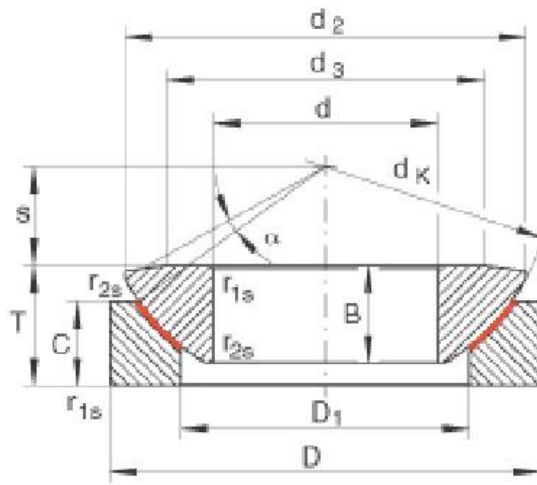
thrust bearings type *GE80 – AW* [17]
